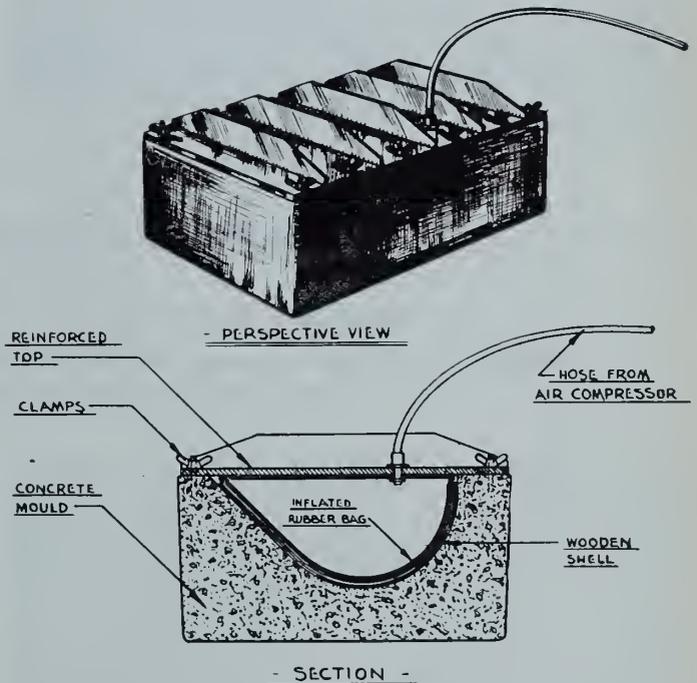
Diagram showing method of moulding with "cold set" adhesive.
